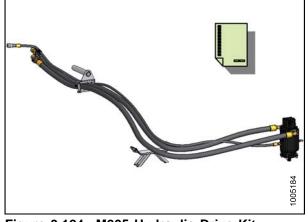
M205 Hydraulic Drive Kit (MD #B5456)
